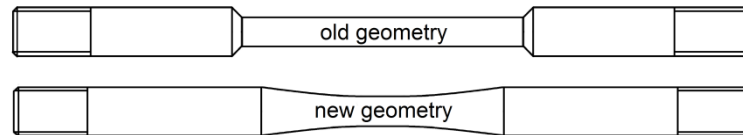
Old and new specimen geometries used for thermo-mechanical tests.
